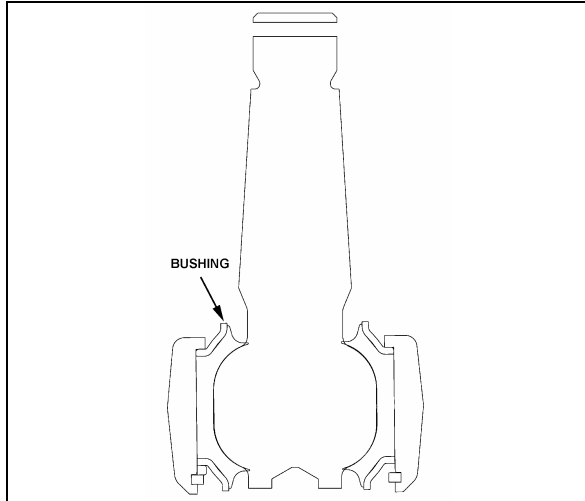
LOWER A-ARM CENTRAL BALL JOINT 16113
